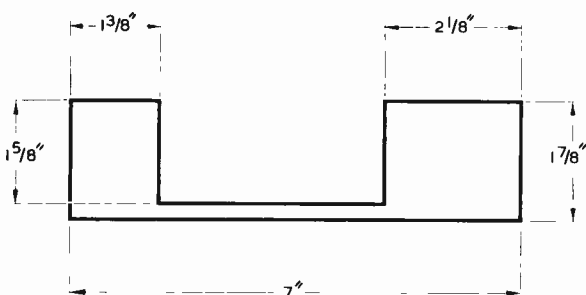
Dimensions of the plywood piece on which are mounted the output transistor heat sink and the input and output sockets
